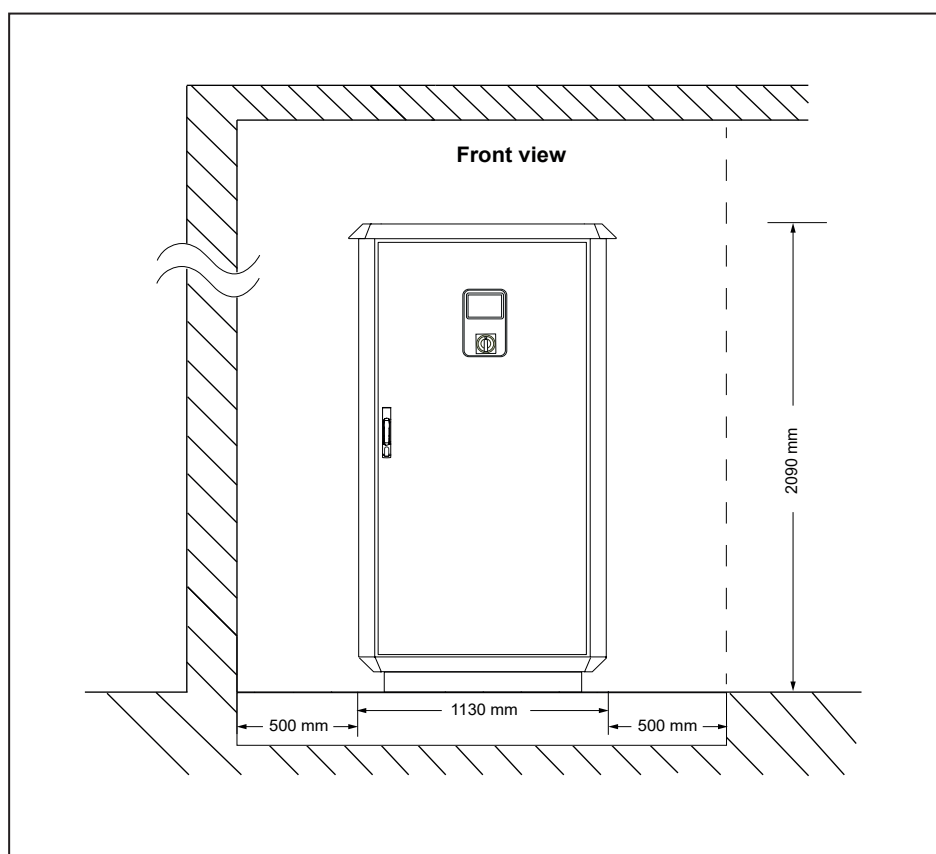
1 Required dimensions for operating location (front view), example for Series KSM/KSM INOX (one door)
